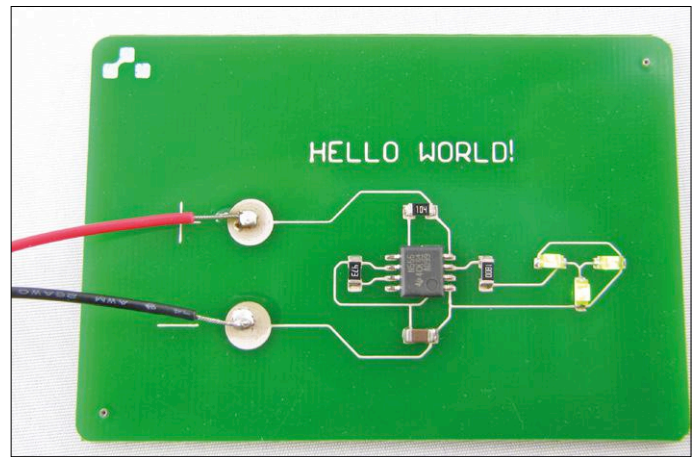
After soldering by the V-One, the finished board is ready for testing.
